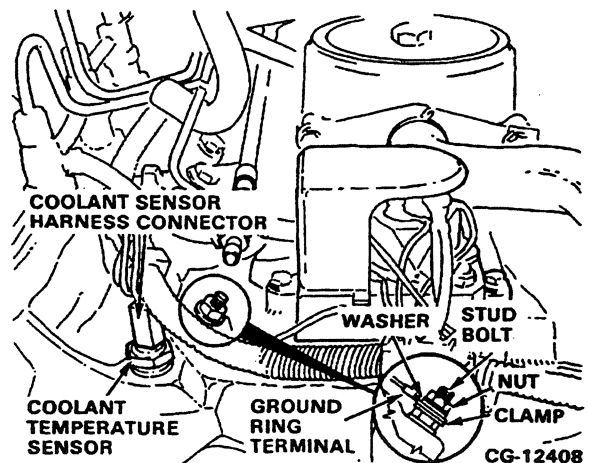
D. Ground Wire and Coolant Sensor Harness Connector Removal
